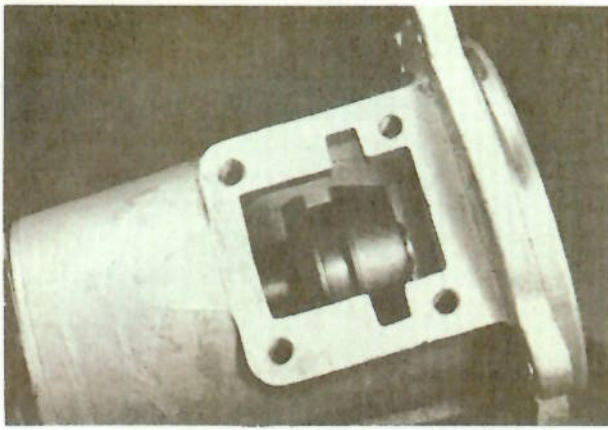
DIRECTION OF THE FRONT DRIVE CLUTCH HUB.
